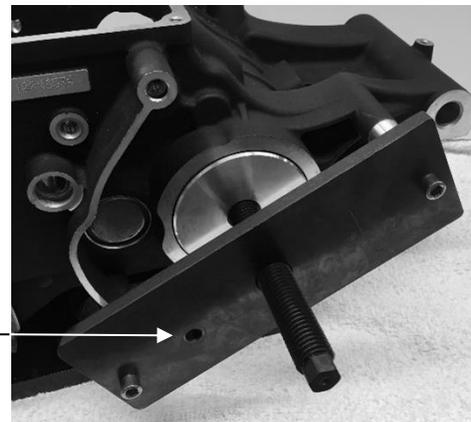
| SUPPORT PLATE POSITION FOR TAPERED BEARING ADAPTER INSTALLATION
